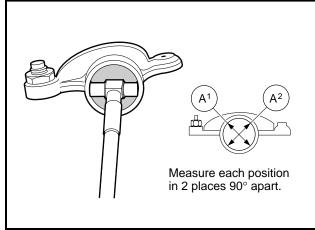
Measure I.D. of Rocker Arm Bearing
